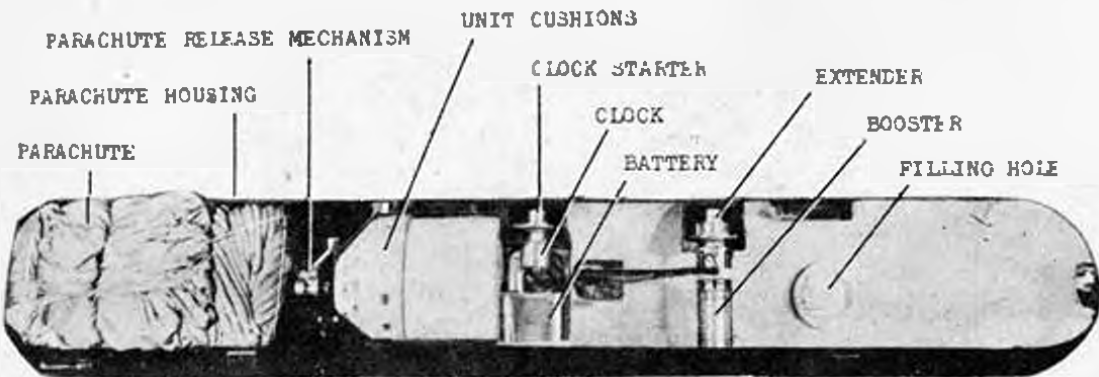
Mk. 12-1 Mine, Cutaway View
